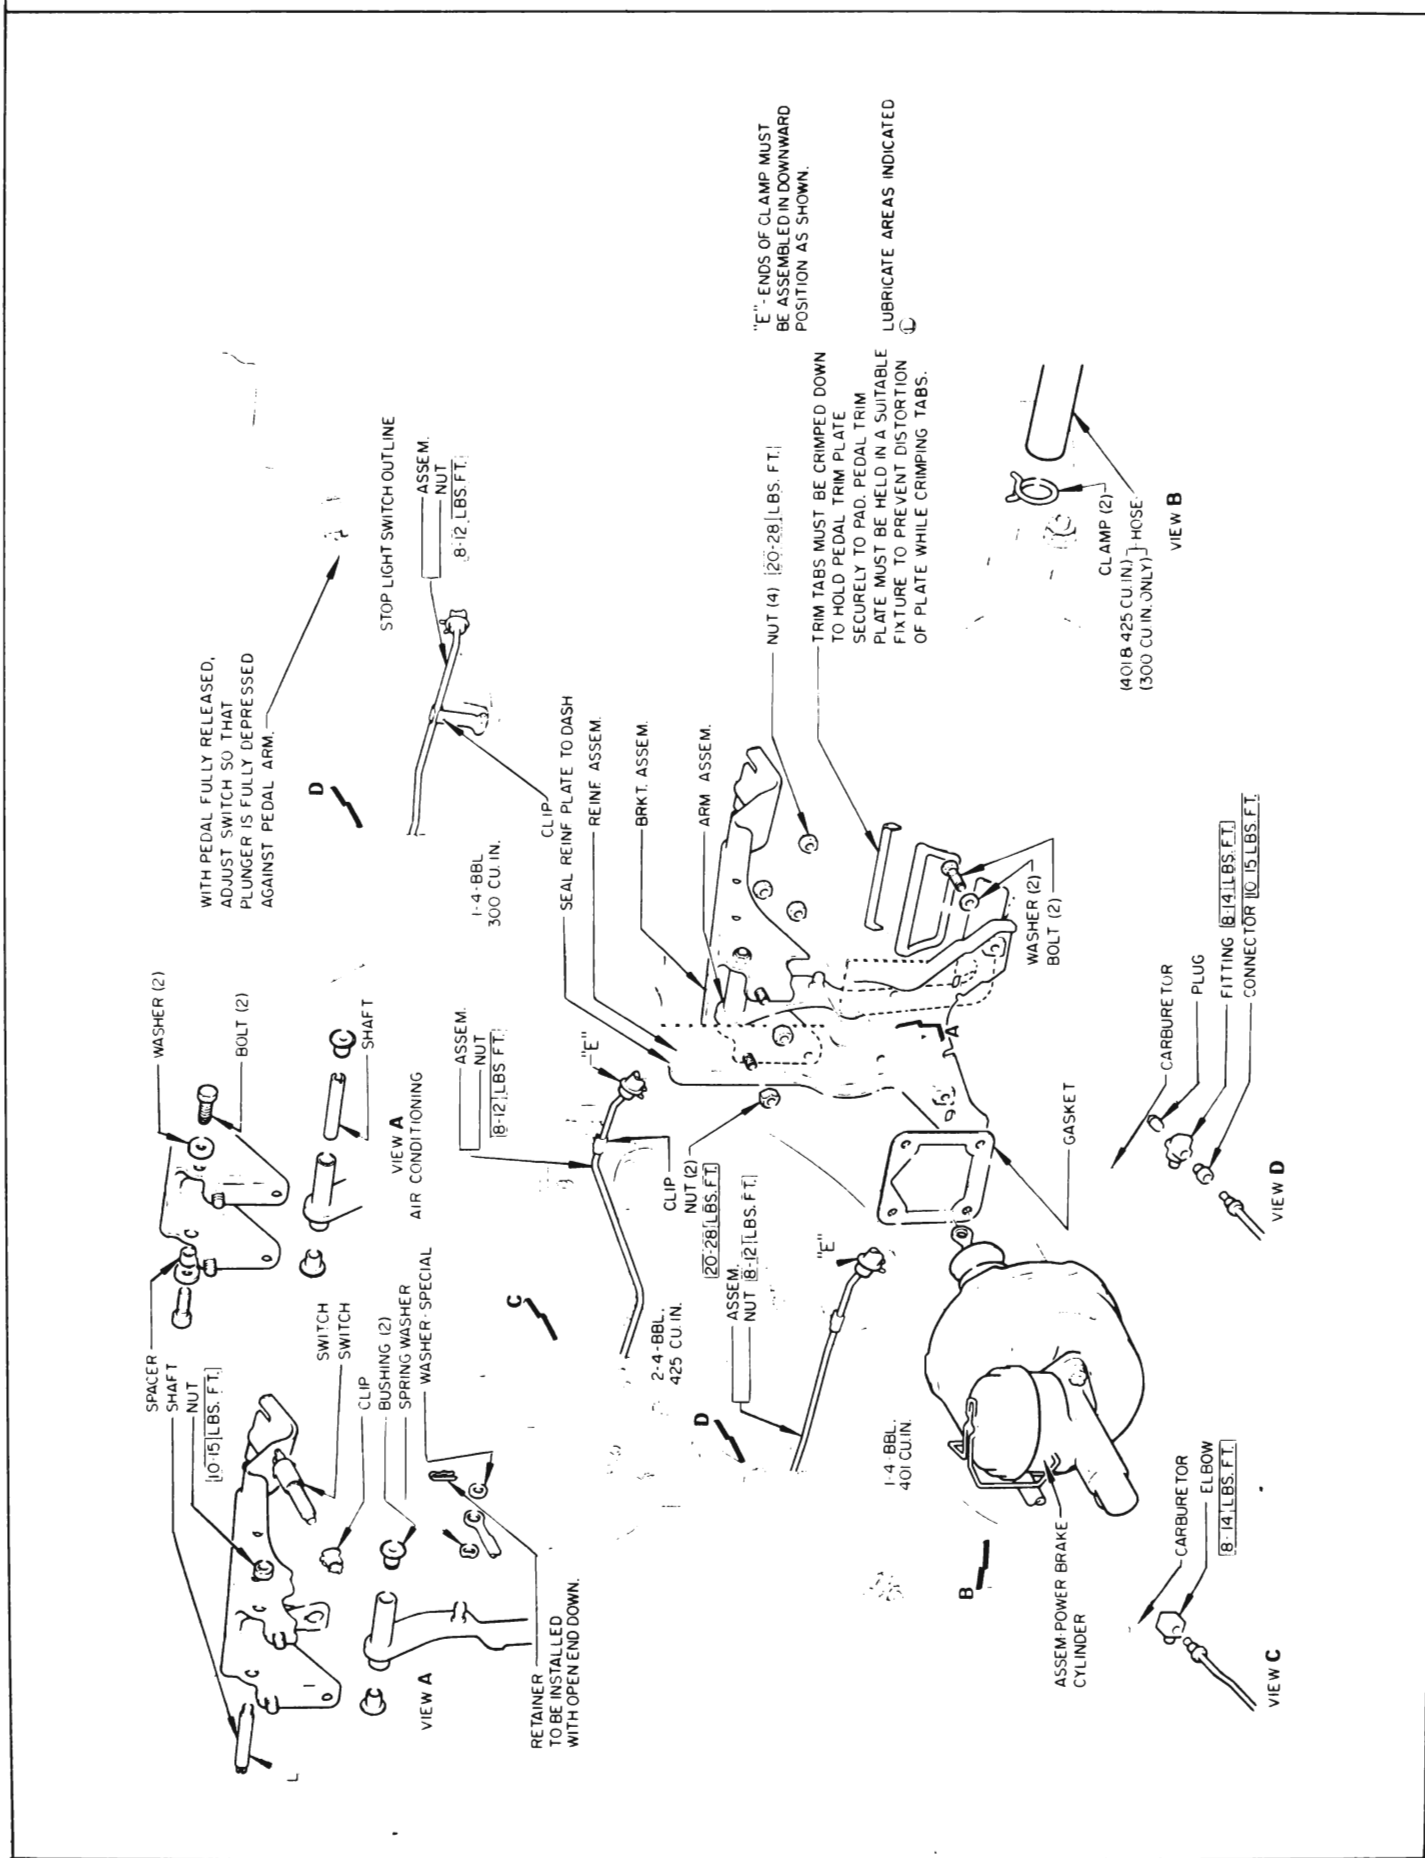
Power Brake Installation (4400-4600 & 4800 Series)
